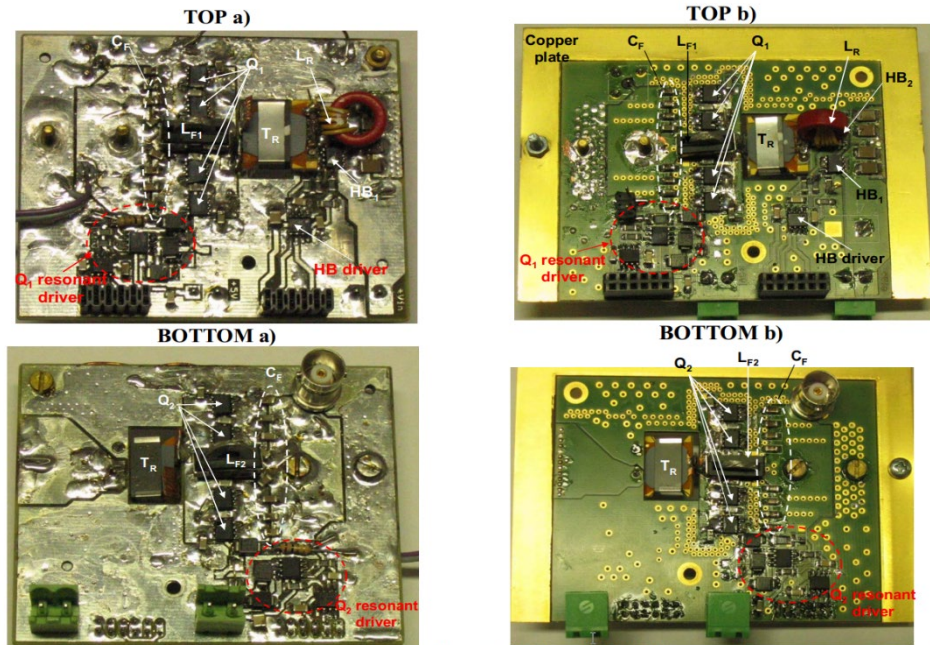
TOP and BOTTOM views of two prototypes: a) assembled two FR4 layers (PCB1); b) PCB with inner baseplate (PCB2)
